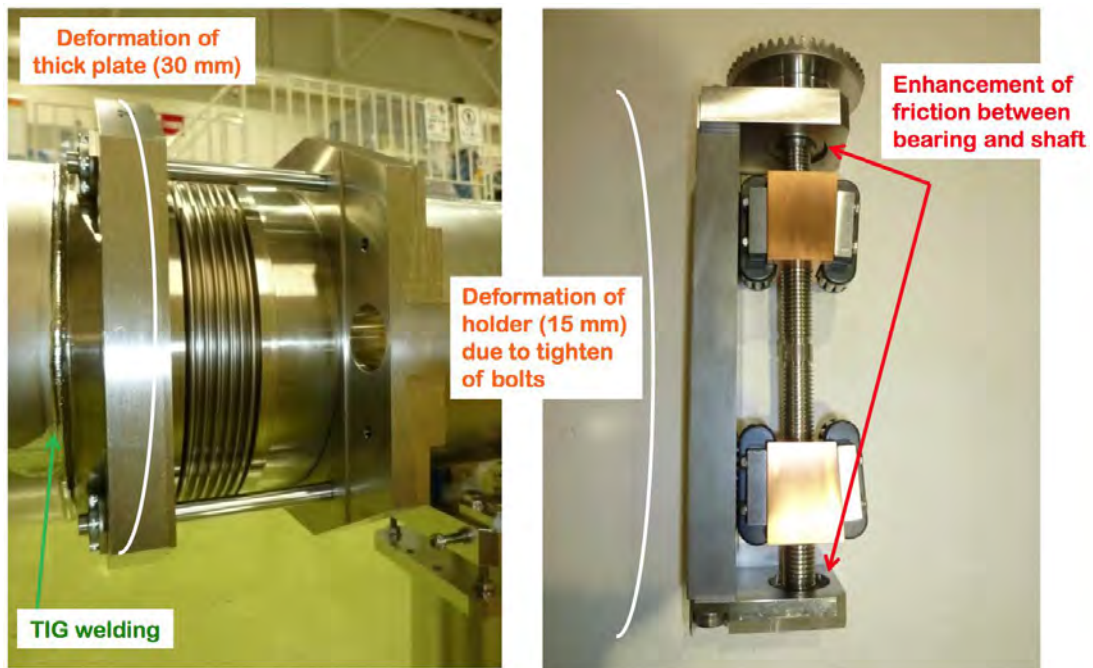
The deformation of the tuner mount flange caused by heat during welding. The jack mechanism was force to align with the deformed flange, which increased the friction of the gear.
